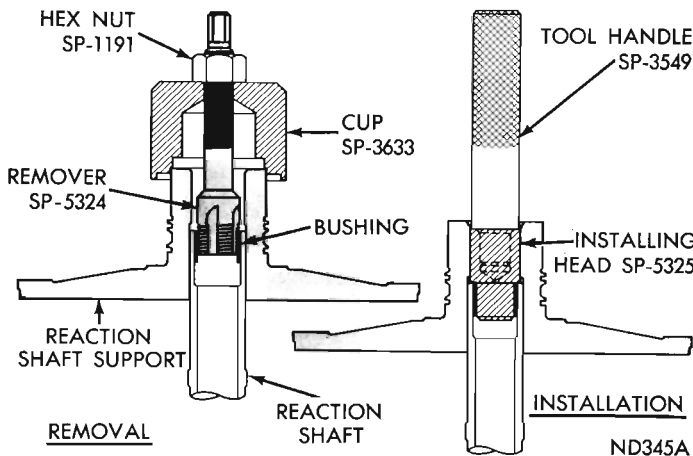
Replacing Reaction Shaft Bushing (A-904)
